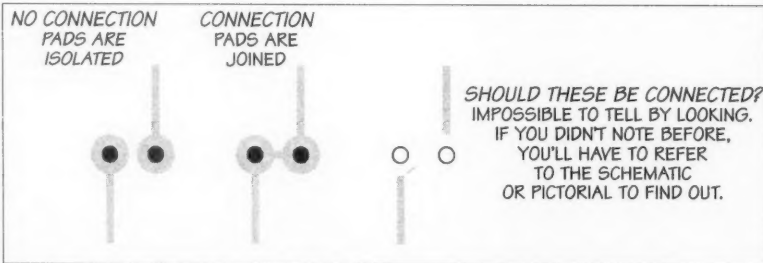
Check and recheck for solder bridges, with a magnifying lens if necessary.
